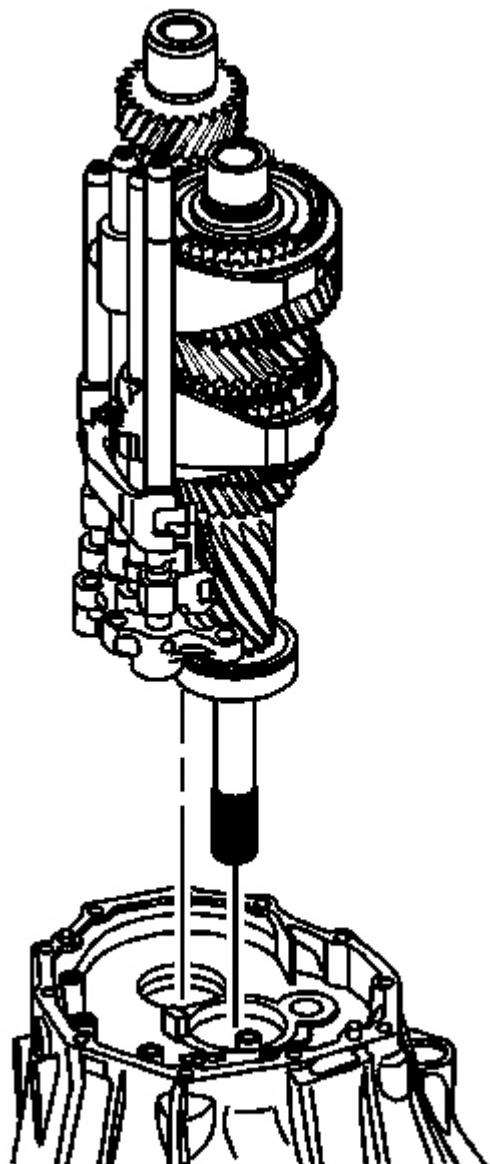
View Of Input Shaft, Countershaft & Shift Rail Assembly
